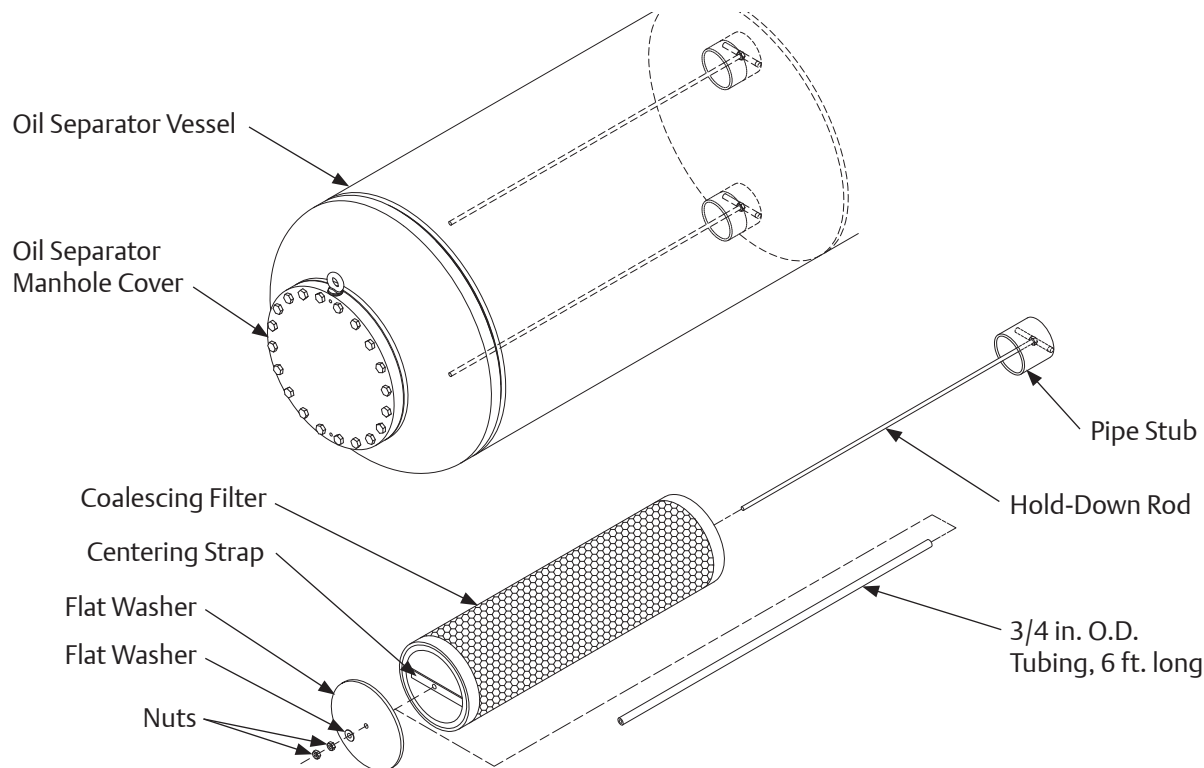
Oil Separator Manhole Cover and Coalescing Filter Assembly
